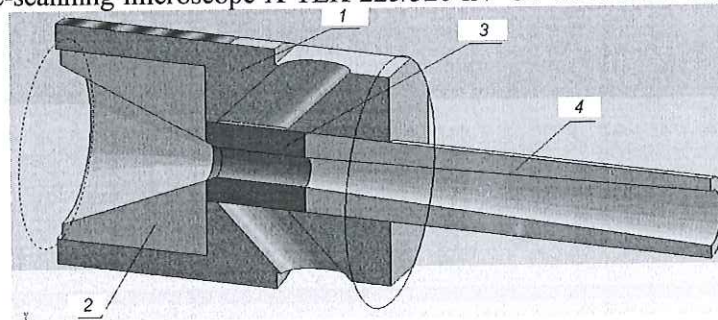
CAD model of basic parts of a newly designed nozzle for the abrasive jet machine: 1) body; 2) wide conical inlet; 3) porous cylindrical tubular insert; 4) narrow and long conical outlet
